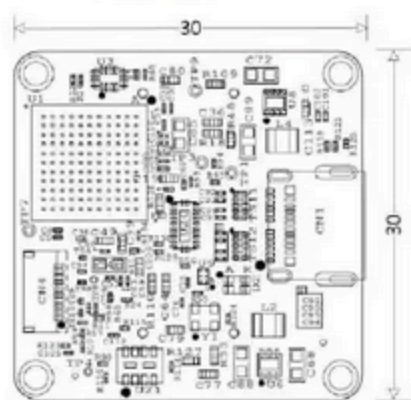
See3CAM_MIPi_BASE15_H01R1 Bottom View
